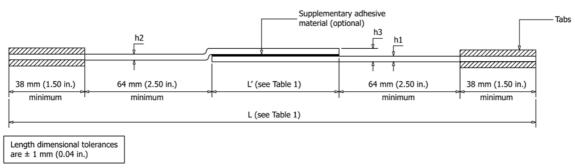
Dimensions for Single-Shear Wet Lay-Up FRP Specimens
